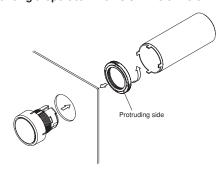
Mounting an operator in a 22.3mm-dia. hole
